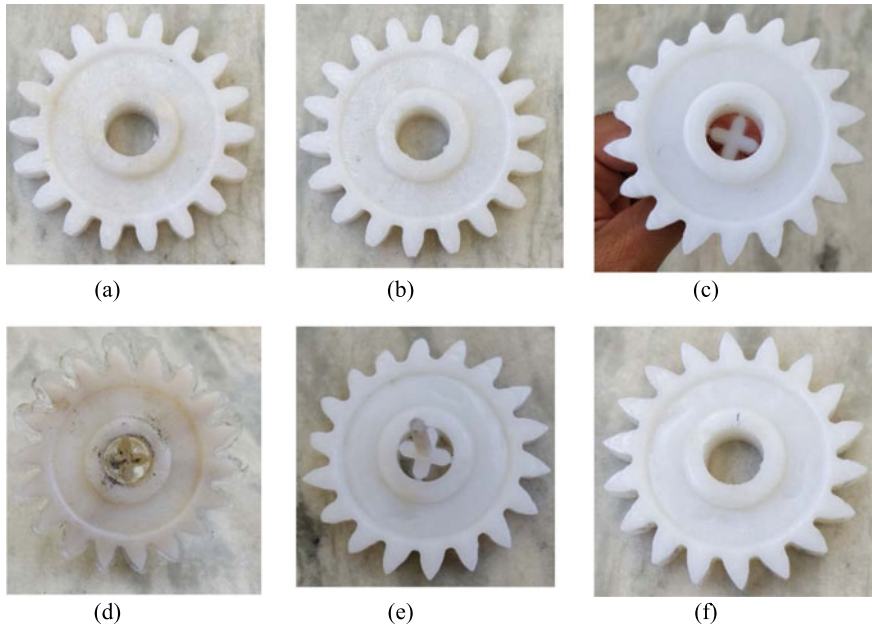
Development and fabrication of injection moulded standard and asymmetric spur gear gone through several trials
